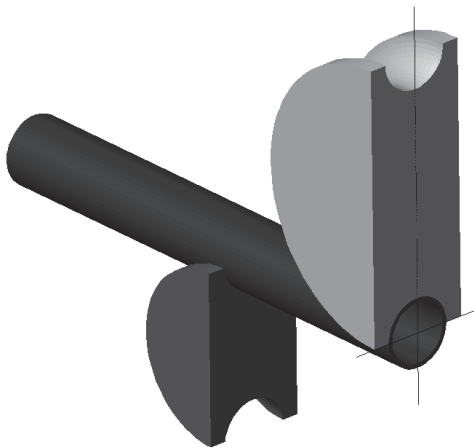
Example of a tube bending die with a circular impression. 1. die, 2. tube, 3. roller
